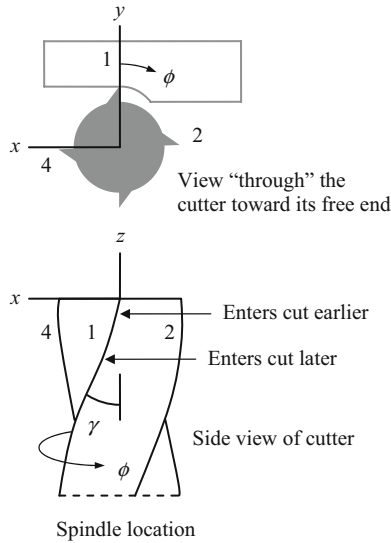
The helical endmill geometry causes the cutting edge to enter and exit the cut at later instants in time when moving from its free end toward the spindle
